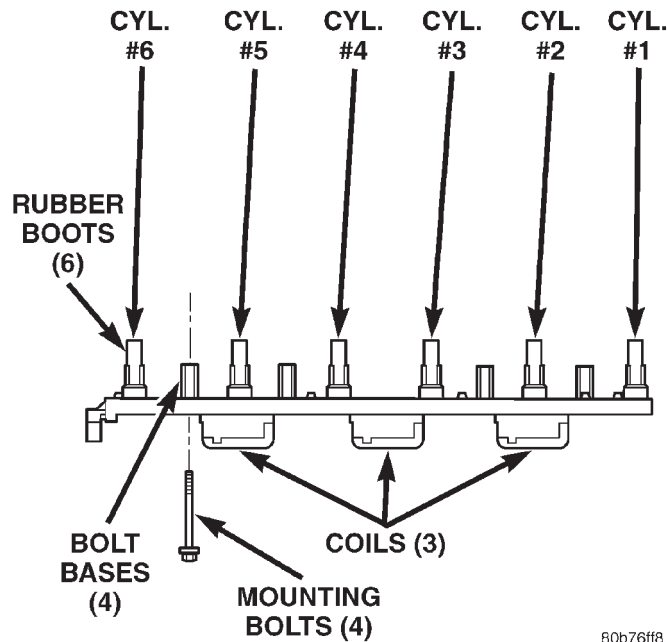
Ignition Coil Assembly—4.0L 6-Cylinder Engine
